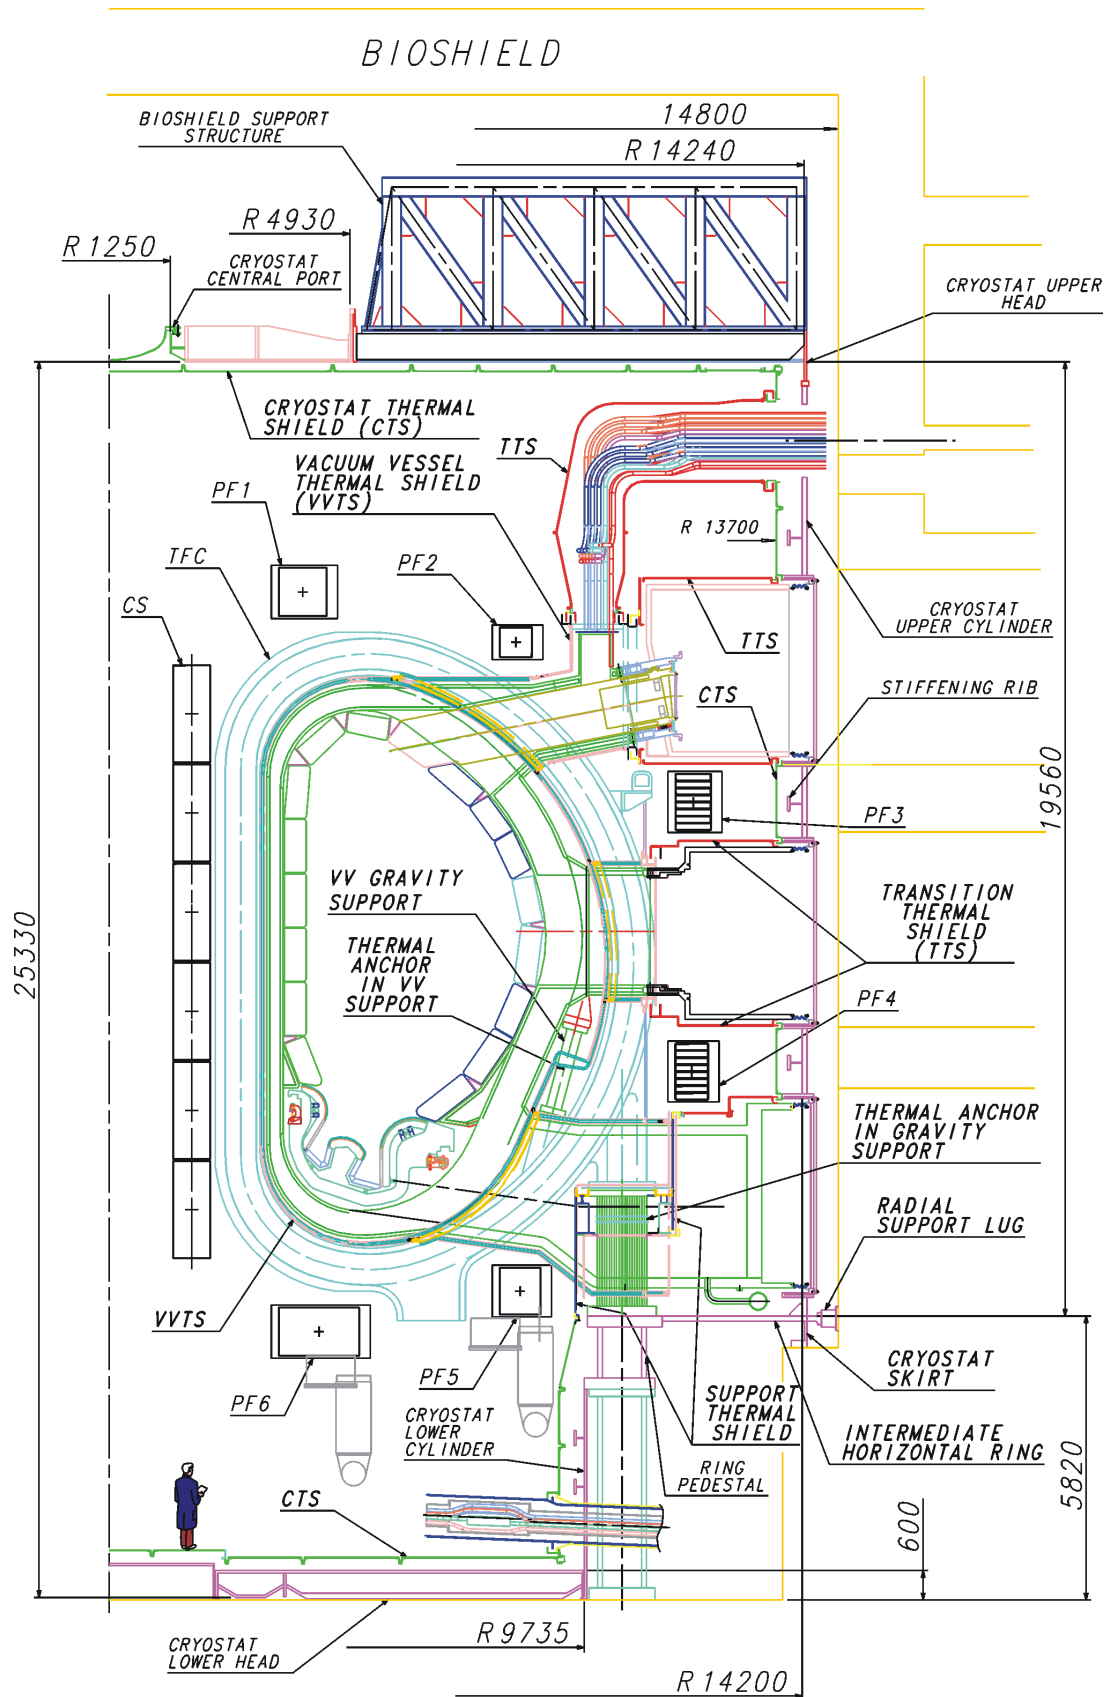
Elevation View of the Cryostat and the Thermal Shield System
